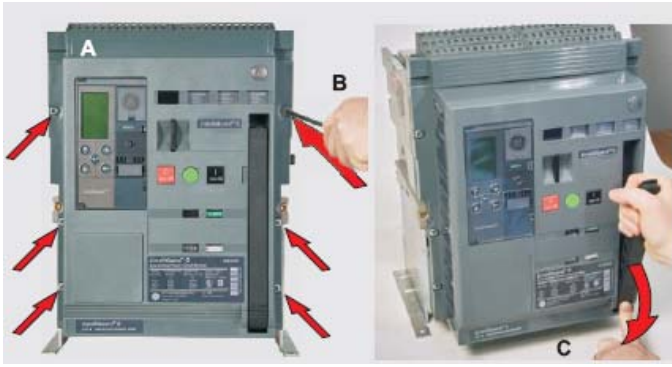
(A) Front Cover (B) Screw Removal (C) Handle Rotation
